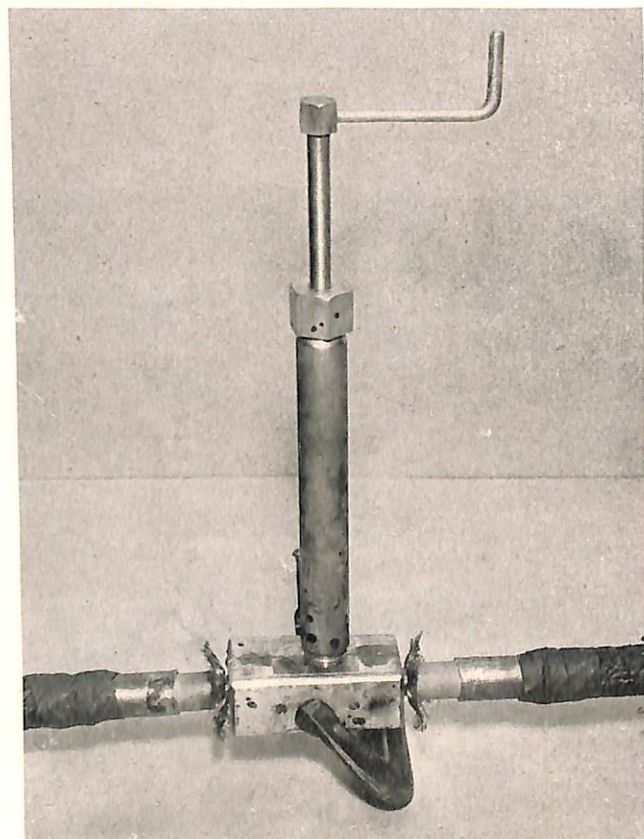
Molding of the polyethylene dielectric over the inner conductor, using the injection gun and mold from the kit.
